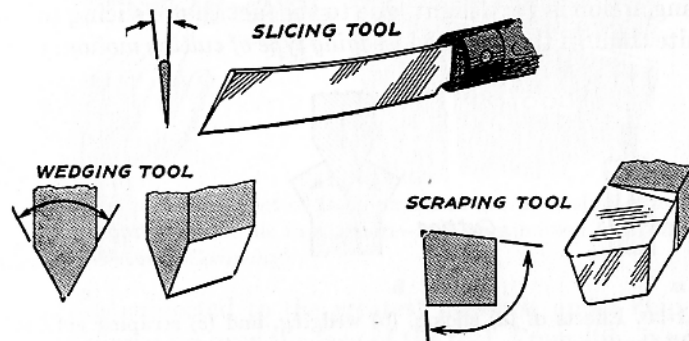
Difference in amount of metal that supports the cutting edge. (The Shell Oil Company)
